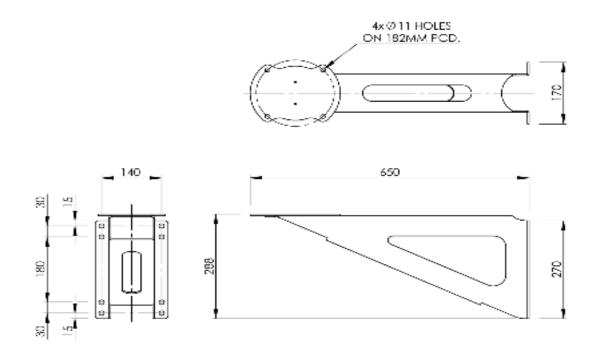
Example mounting bracket: BPW6500 Wall Bracket
